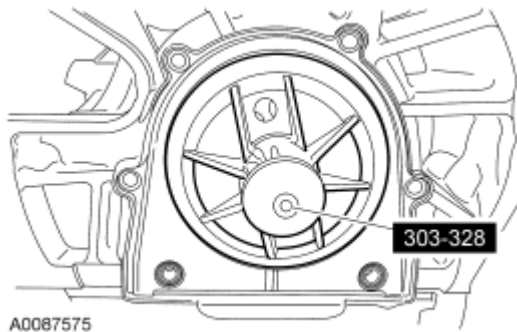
Positioning Crankshaft Rear Oil Seal Using Special Tool (303-328)
